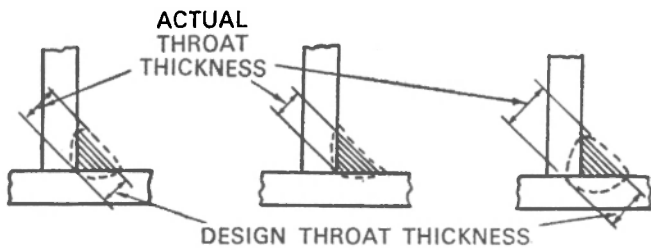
Examples of actual throat thickness of fillet welds compared with design throat thickness.
